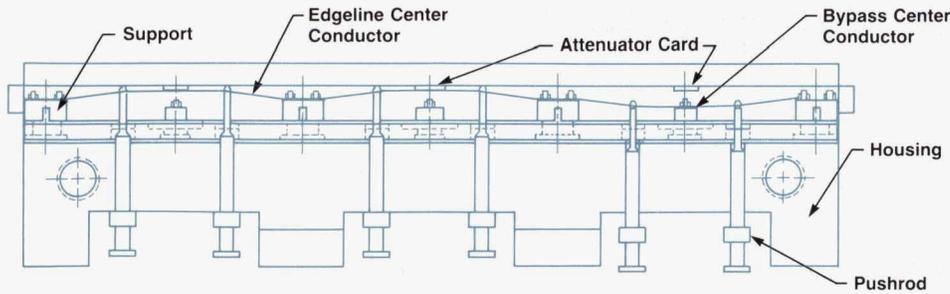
Cutaway side view of a three-section attenuator with solenoids removed.
